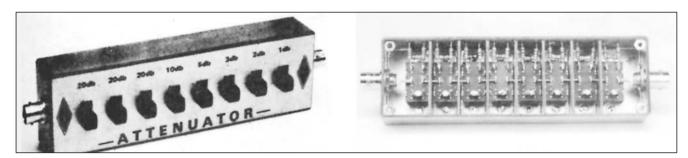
A construction method for a step attenuator. Double-sided circuit-board material, unetched (except for panel identification), is cut to the desired size and soldered in place. Flashing copper may also be used, although it is not as sturdy. Shielding partitions between sections are necessary to reduce signal leakage. Brass nuts soldered at each of the four corners allow machine screws to secure the bottom cover. The practical limit for total attenuation is 80 or 90 dB, as signal leakage around the outside of the attenuator will defeat attempts to obtain much greater amounts.
